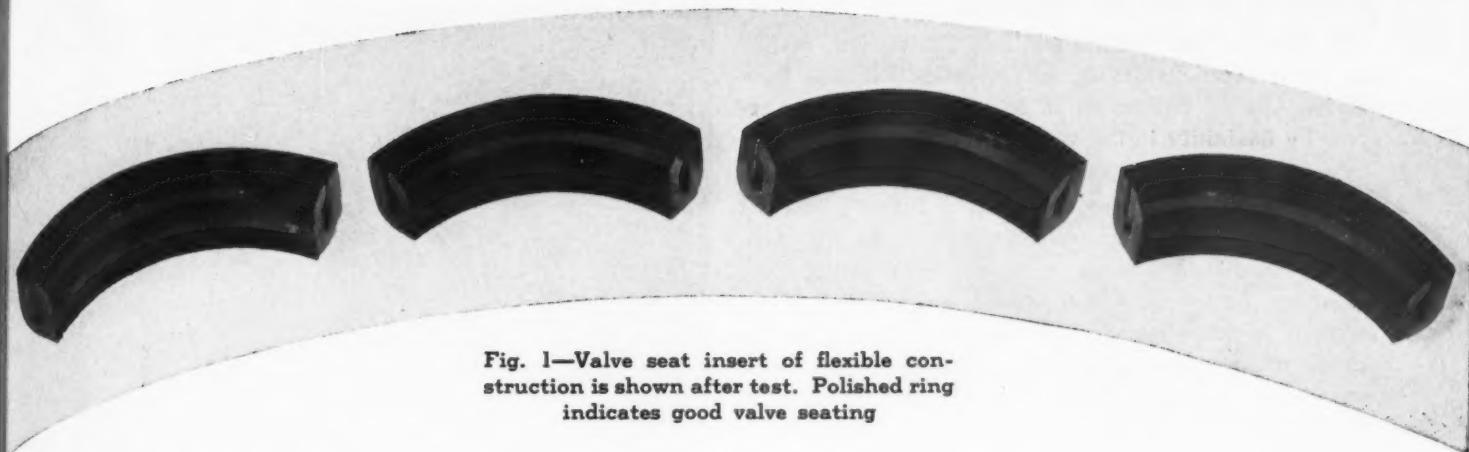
Valve seat insert of flexible construction is shown after test. Polished ring indicates good valve seating
